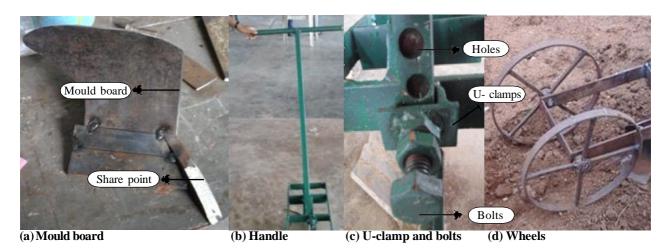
Major components of mould board weeder (a) Mould board (b) Handle (c) U-clamp and bolts (d) Wheels
